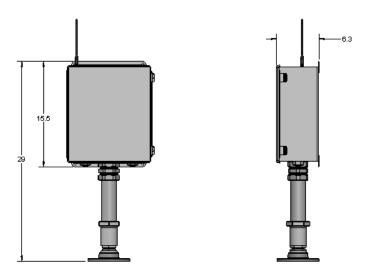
PCU – wireless version without photocell shown (dimensions in inches)
